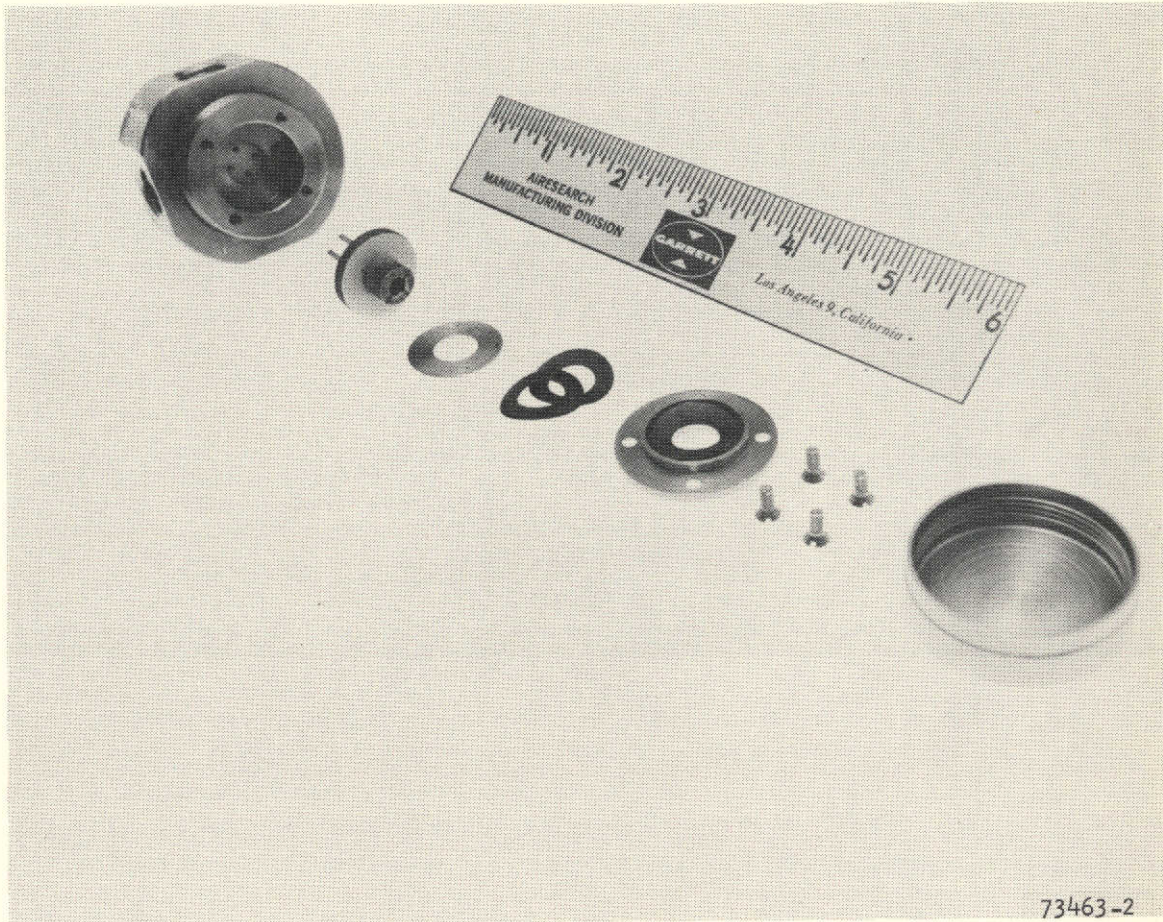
Exploded View of Three-Way Isolation Valve
